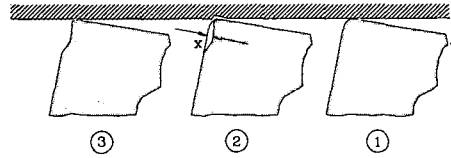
Tool paths, (1) before fracture, (2) at fracture, (c) after fracture
